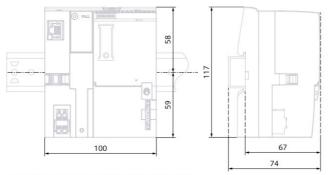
Dimension drawing CPU 1512SP-1 PN
